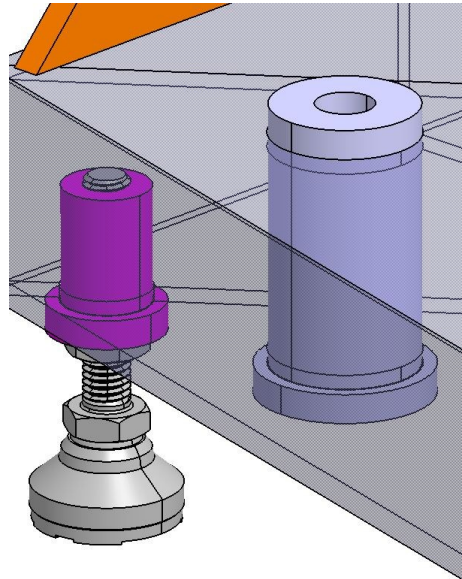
Example of TDM (right) and foot (left) mounting bushings used throughout the fixtures
